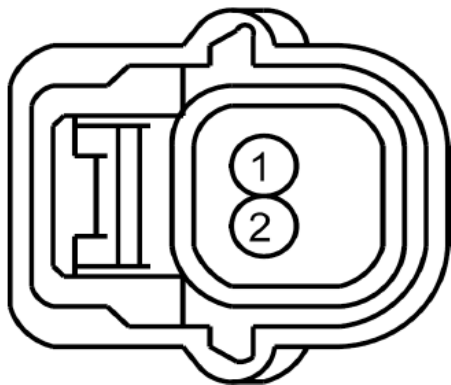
Right 1 Side Air Curtain Sensor Connector End View (C3058)
